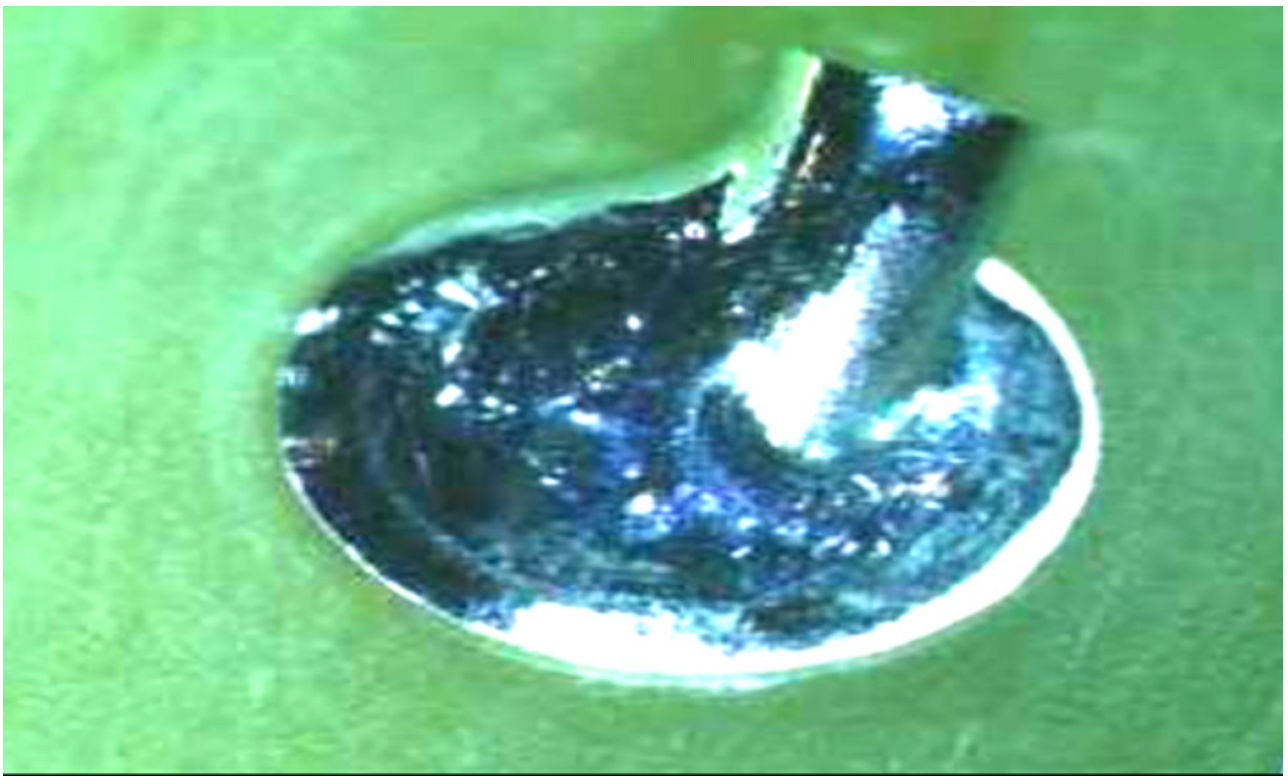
Cold solder joints tend to look dull and grainy instead of shiny and smooth.
